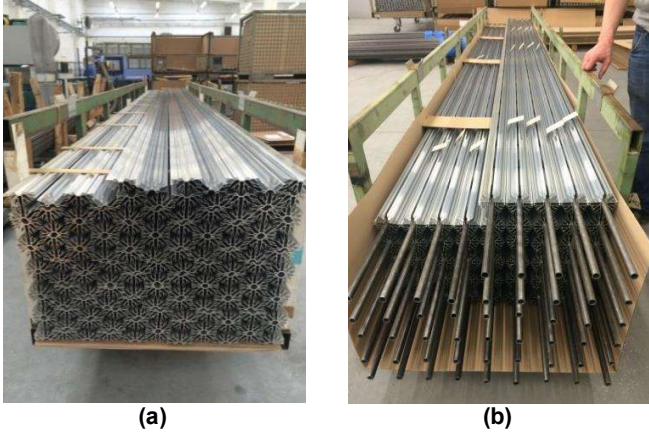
Finned-tube assembly showing (a) the prepared fin segments and (b) mounted finned tubes.
